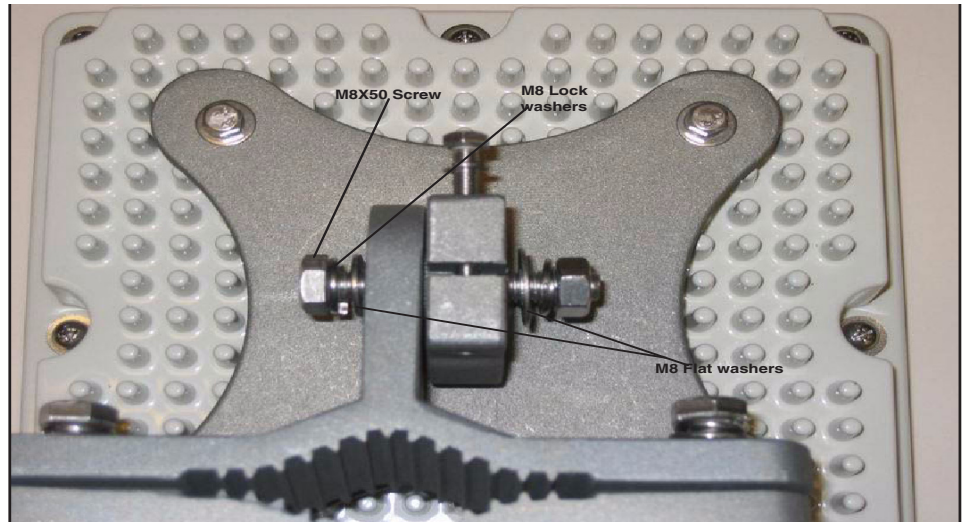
Attaching Base Support of the ODU to Inner Pole Support
